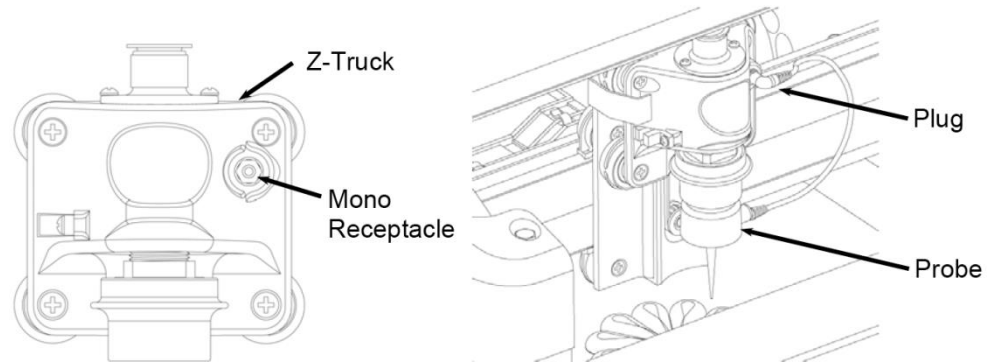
PLUGGING IN THE PROBE IN MOST A-SERIES MACHINES
